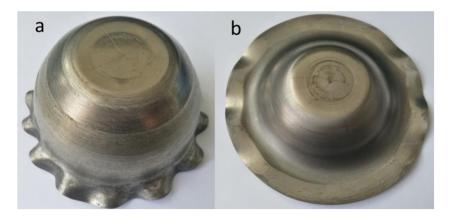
Spin formed components obtained using: a electro-assisted thermoforming; b room temperature forming
